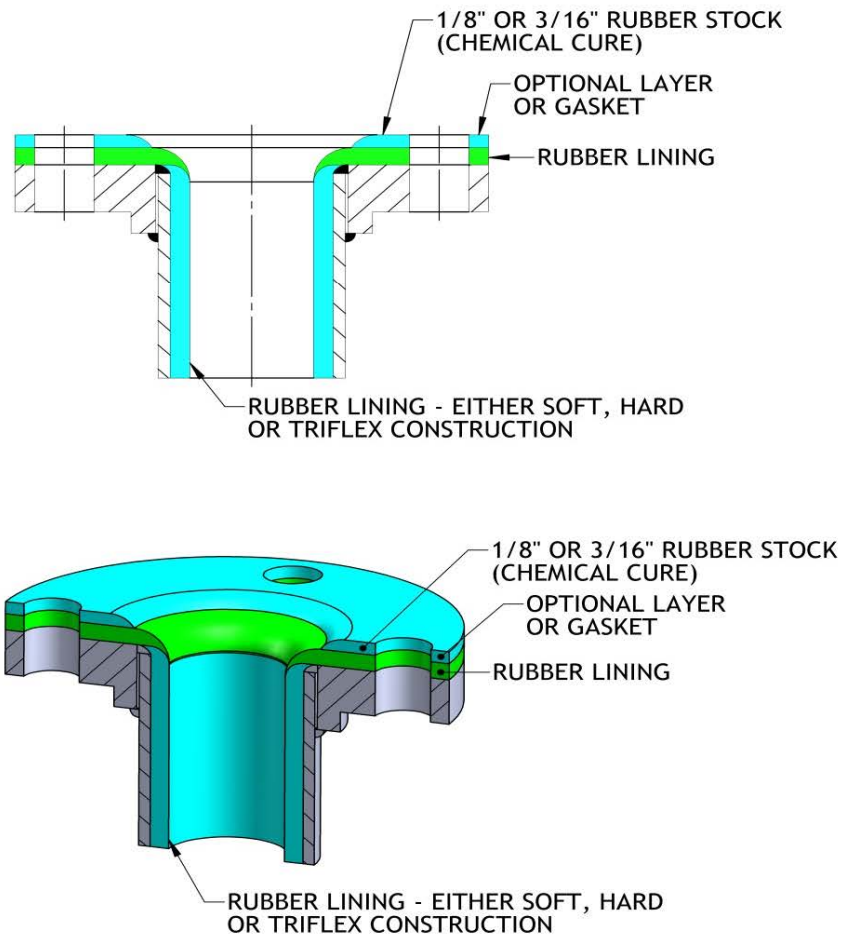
Internal steam cure vessel - Flange detail for outlets
